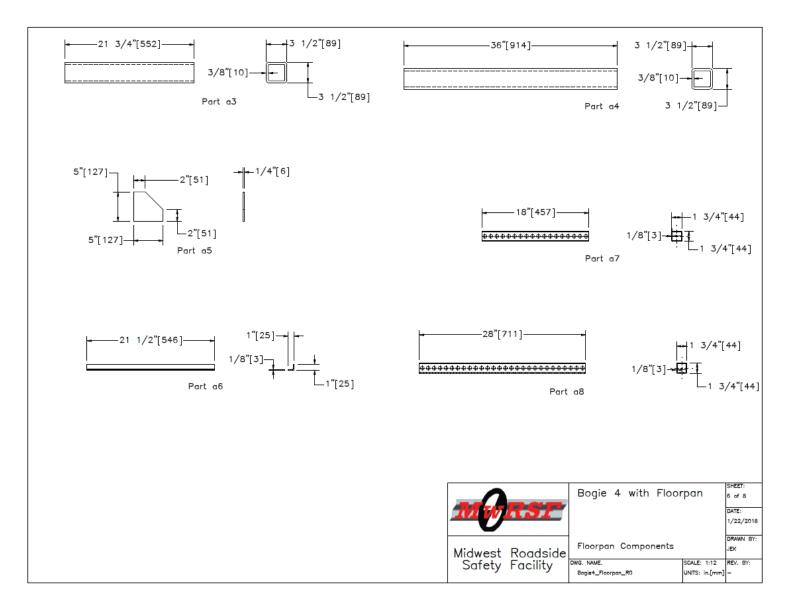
Floor Pan Components, Test Nos. MWPFP-22 through MWPFP-26
